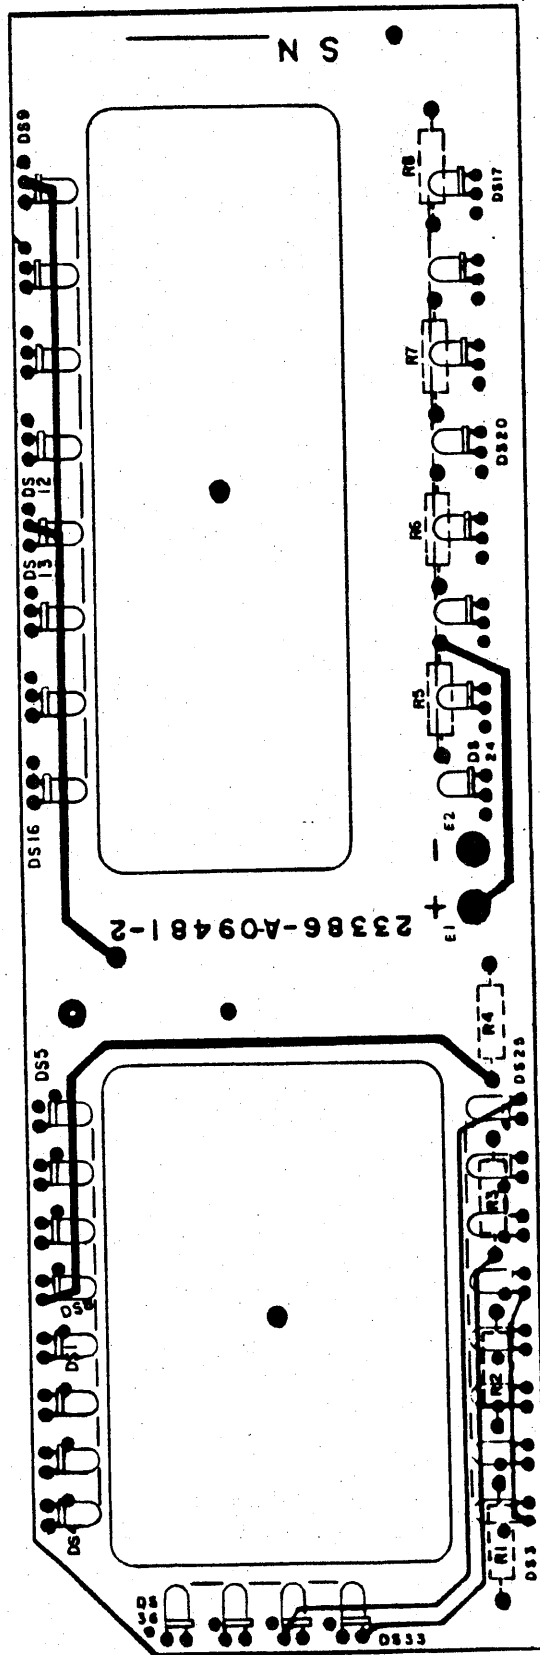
LCD/LED Circuit Card Assembly (A9A3)
